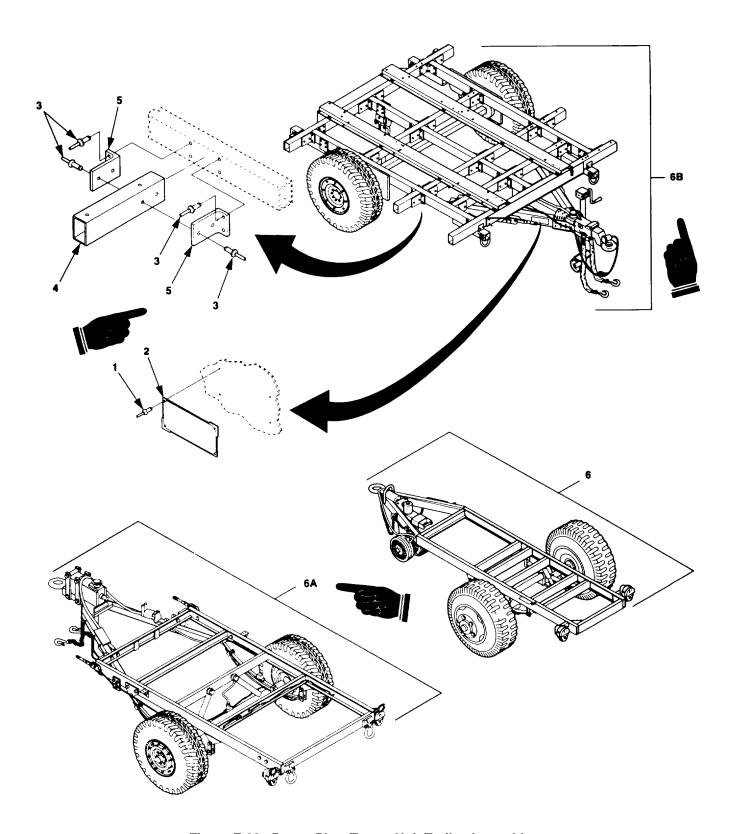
Power Plant/Power Unit Trailer Assembly.
